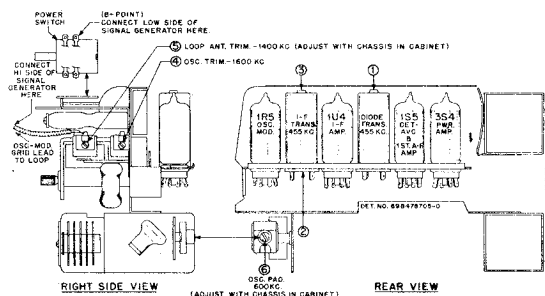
CHASSIS HS-62 TUBE & TRIMMER LOCATIONS
